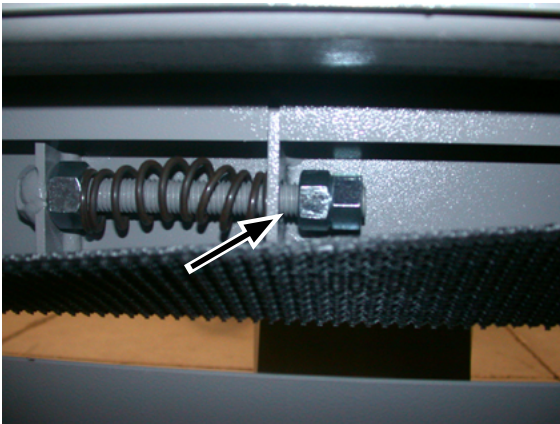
Proper gap between tensioning nut and fixed plate.
